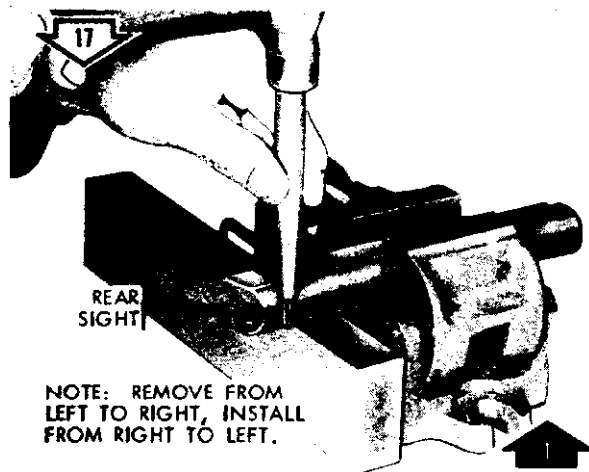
Disassembly/assembly of barrel and slide group (3 of 4).
